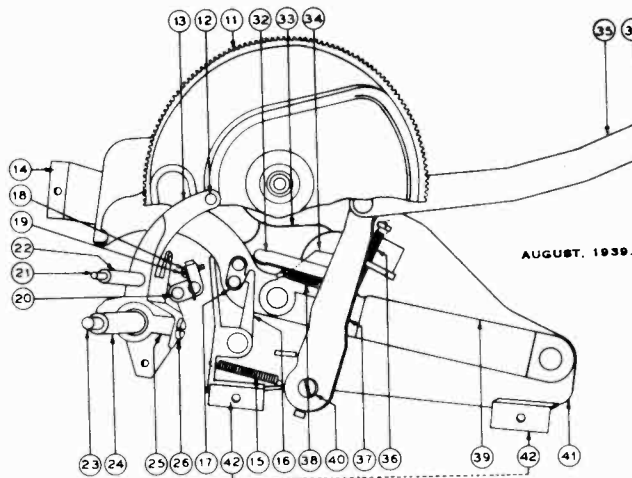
CUTAWAY VIEW SHOWING PARTS UNDER SUB-PLATE ASSEMBLY (83)
